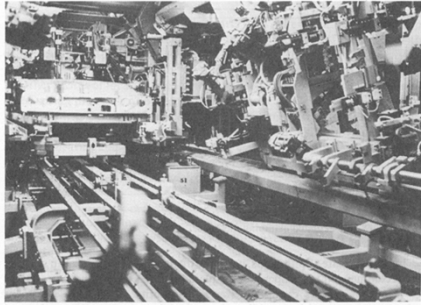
Typical example of sophisticated, extensive weld tooling and fixturing. Shown is Gilman framing, assembly robot line. Welding done on auto frames and car roofs, fully automated and computerized. (Courtesy, The Milwaukee Journal.)
